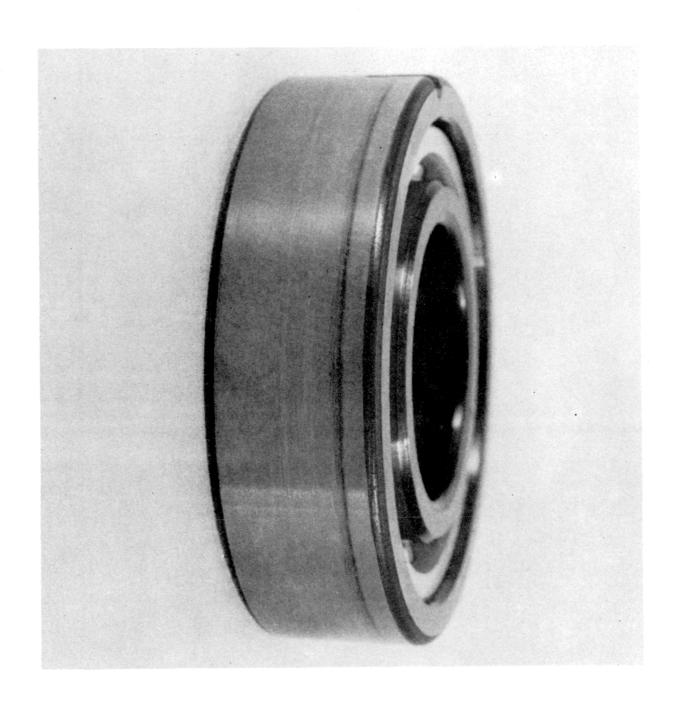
NASA 6:1 Compressor Test Rig, Inducer Failure, Bearing P/N 976693-1, Evidence of Outer Race Rotation.
